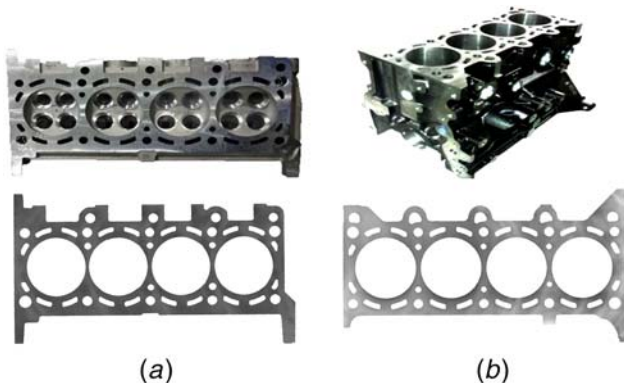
(a) Engine cylinder head surface and (b) engine cylinder block surface
